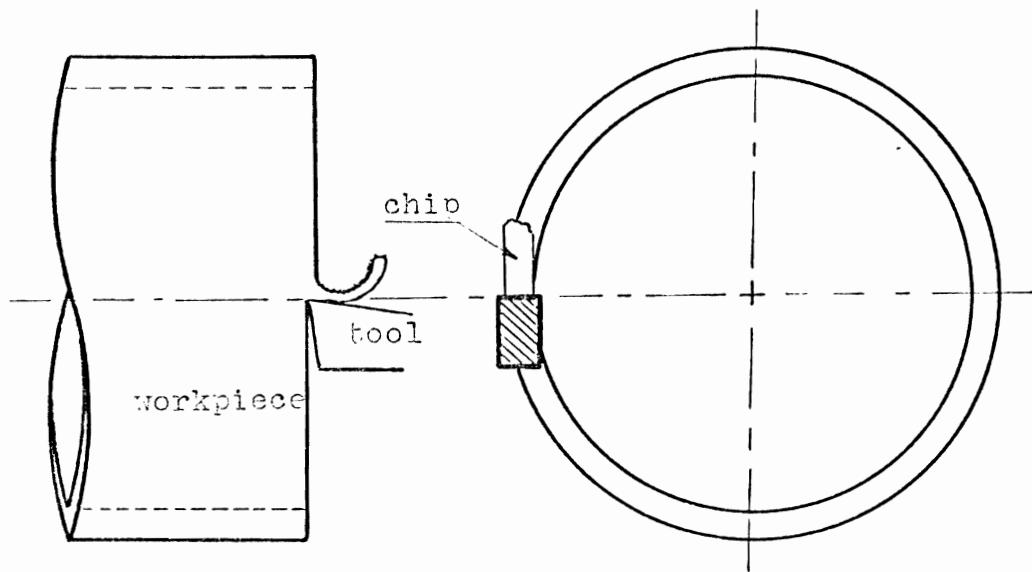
Tool-chip-workpiece system in orthogonal cutting.
